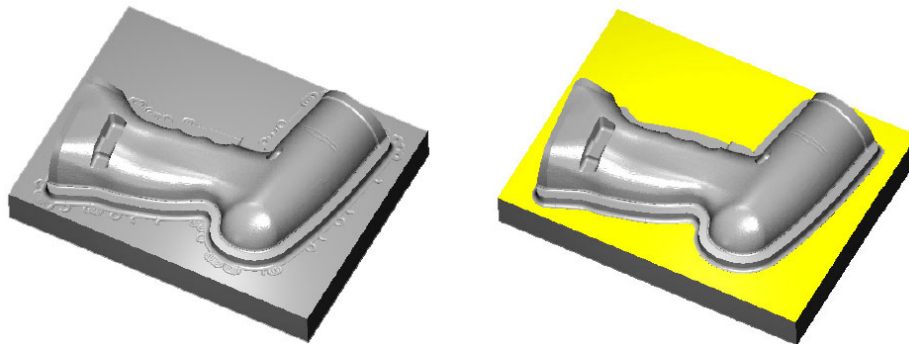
SolidVerify display of the removed material after final “Horizontal machining” sequence
